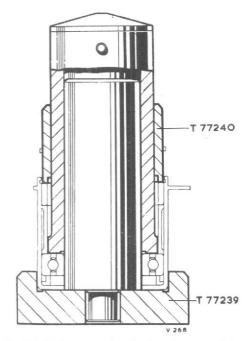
Outer race of roller bearing tapped into position by the adapter sleeve
